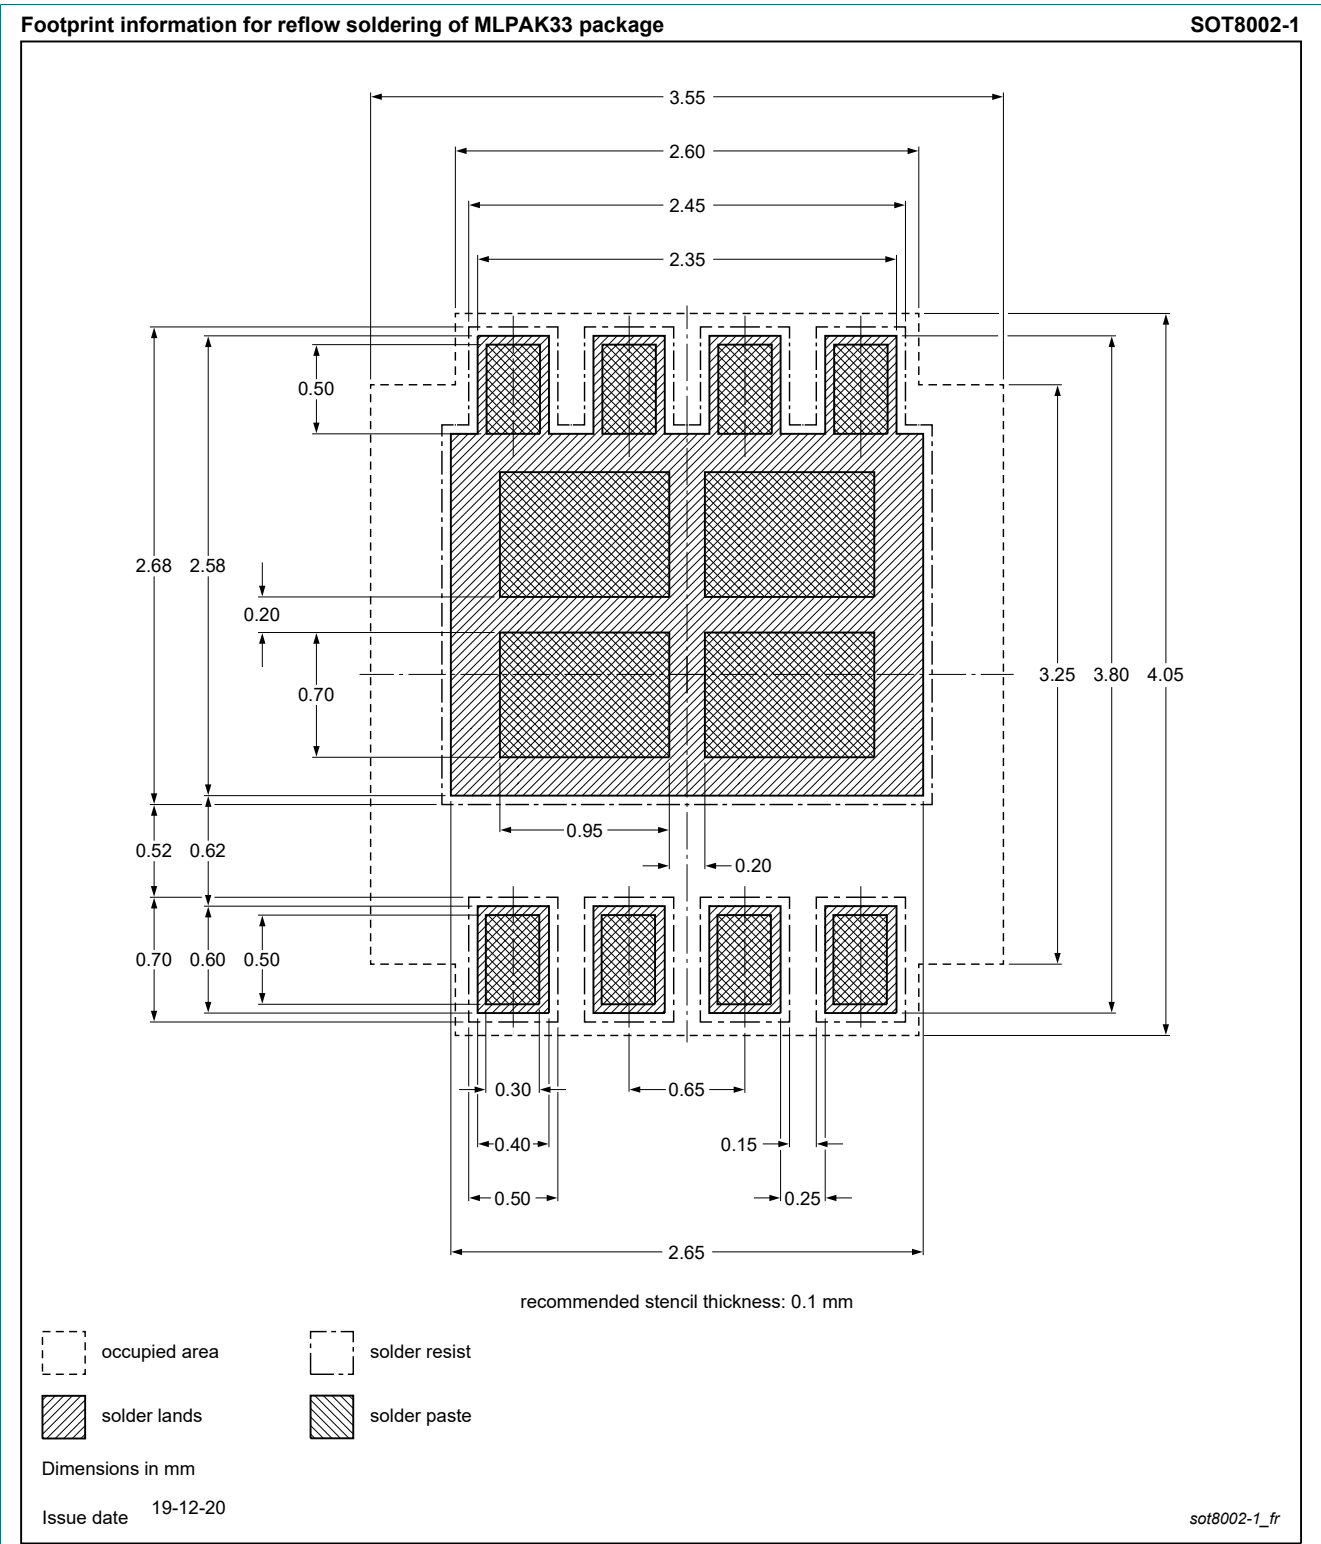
Reflow soldering footprint for MLPAK33 (SOT8002-1)
